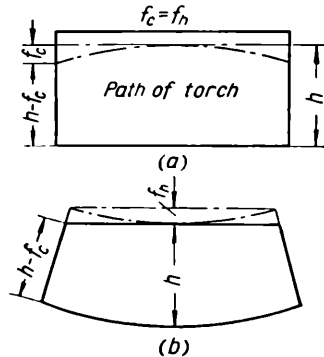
Counter-deflection of a template on one side to control buckling of a rectangular workpiece:
